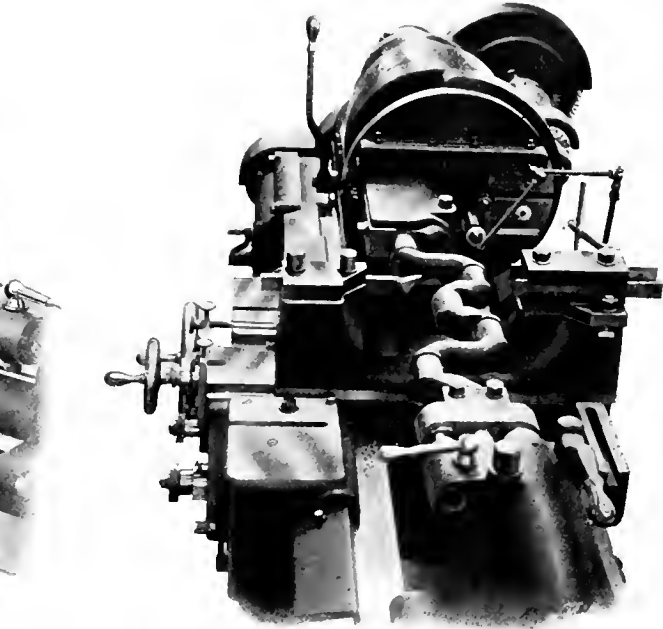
The Arrangement of the Tools for Cutting the Fillets and Turning the Crank-pins
